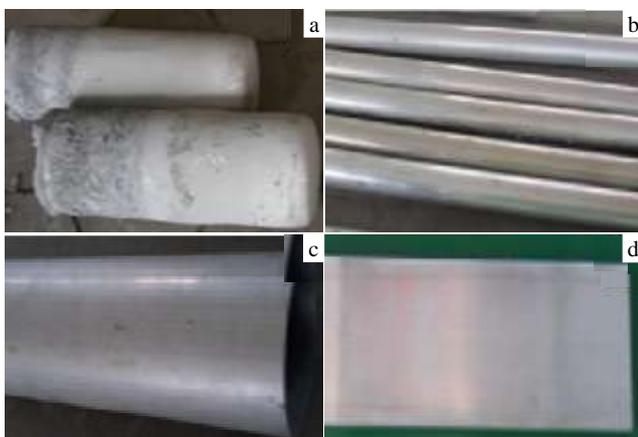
Billets and extrusion products: (a) billets as-deposited, (b) bar, (c) seamless pipe, and (d) stripper plate
